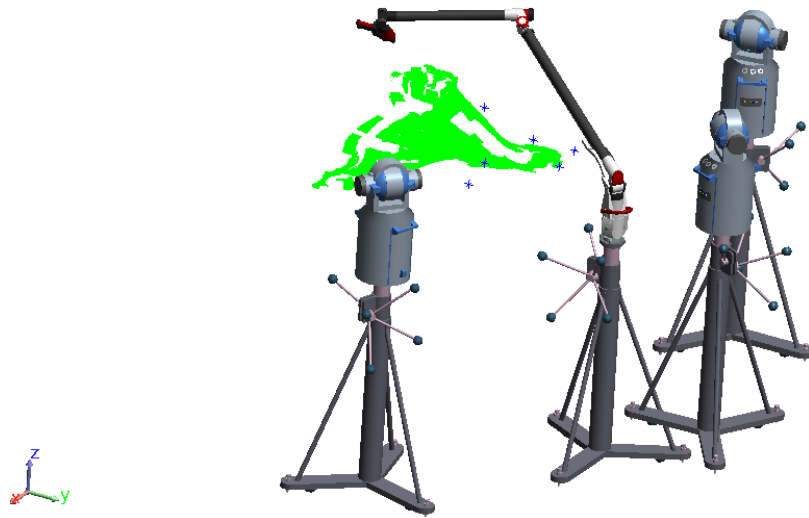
Laser scanning the invar tool surface for CAD alignment using a ROMER articulated measurement arm coupled with a CMS 108 scanning head.
